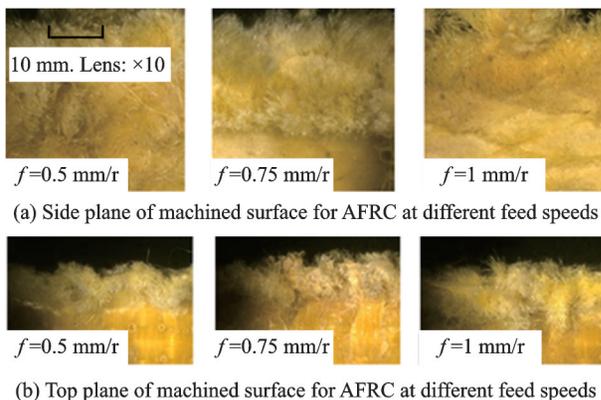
Delamination defects for AFRC for machining directions at 0°
